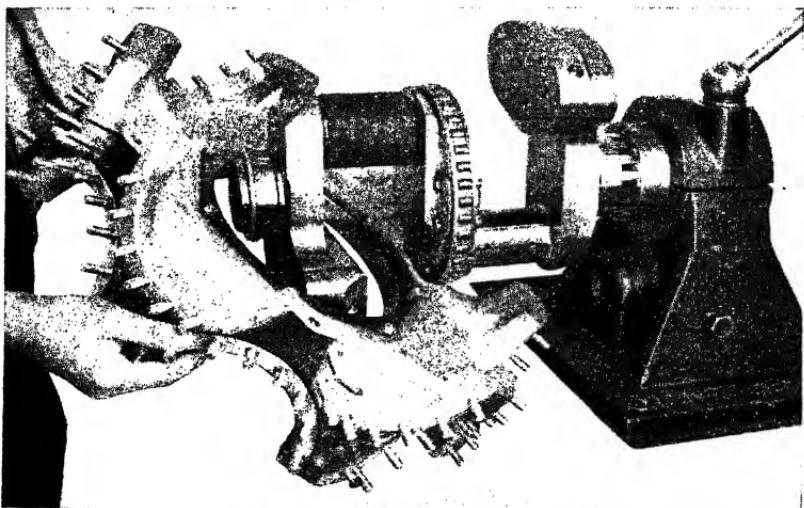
Center main case must be "threaded" over the counterweight in this way.
